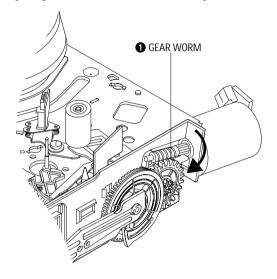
Damper Capstan, Motor Capstan Ass'y Removal
